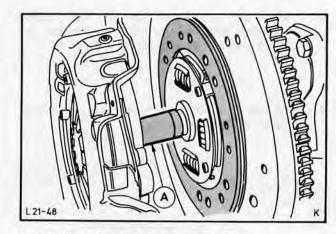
Centre clutch disc and pressure plate A – Special Tool 21–080
